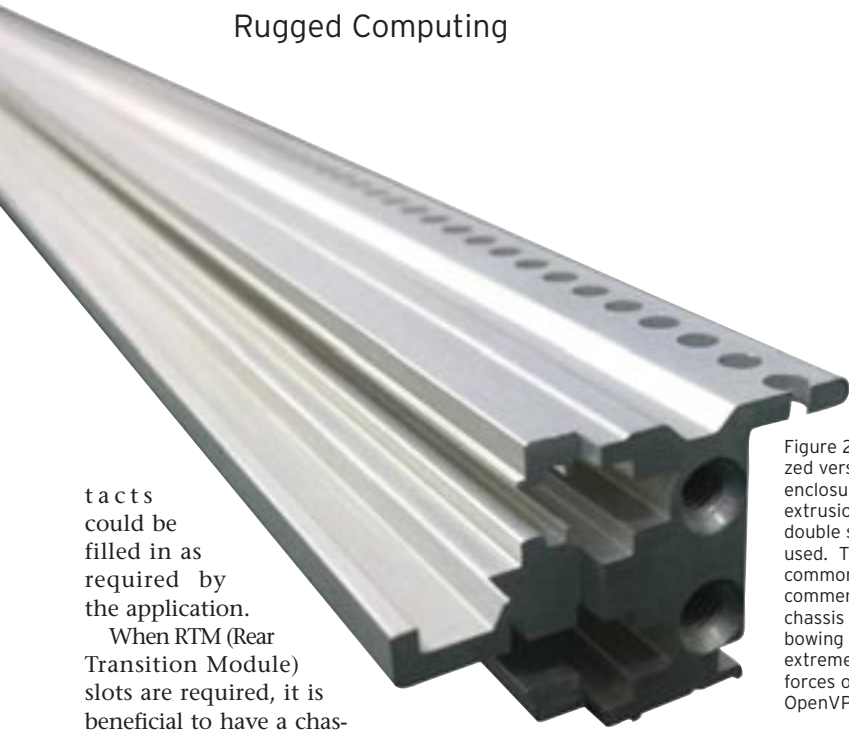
For ruggedized versions of the enclosures, thicker extrusion rails with double screws can be used. They are also commonly used in commercial-grade chassis to prevent bowing from the extreme insertion forces of 6U OpenVPX boards.
